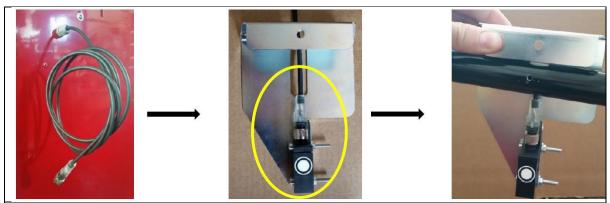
and Picture F6.6: Remove the wheel guard from the packaging and place it on the tube.
